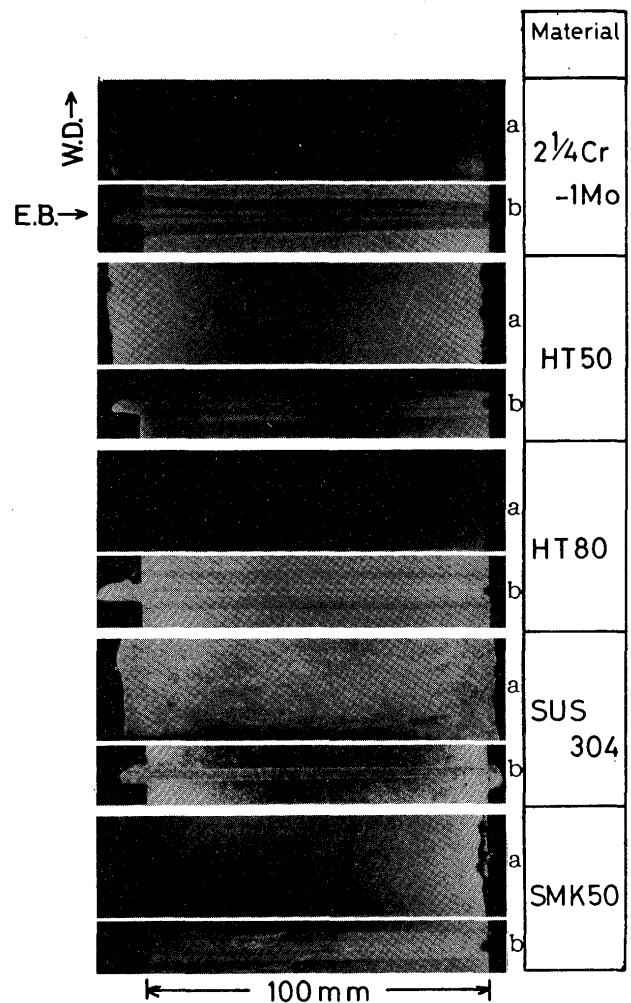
Bead cross sections of various kinds of material welded by electron beam
